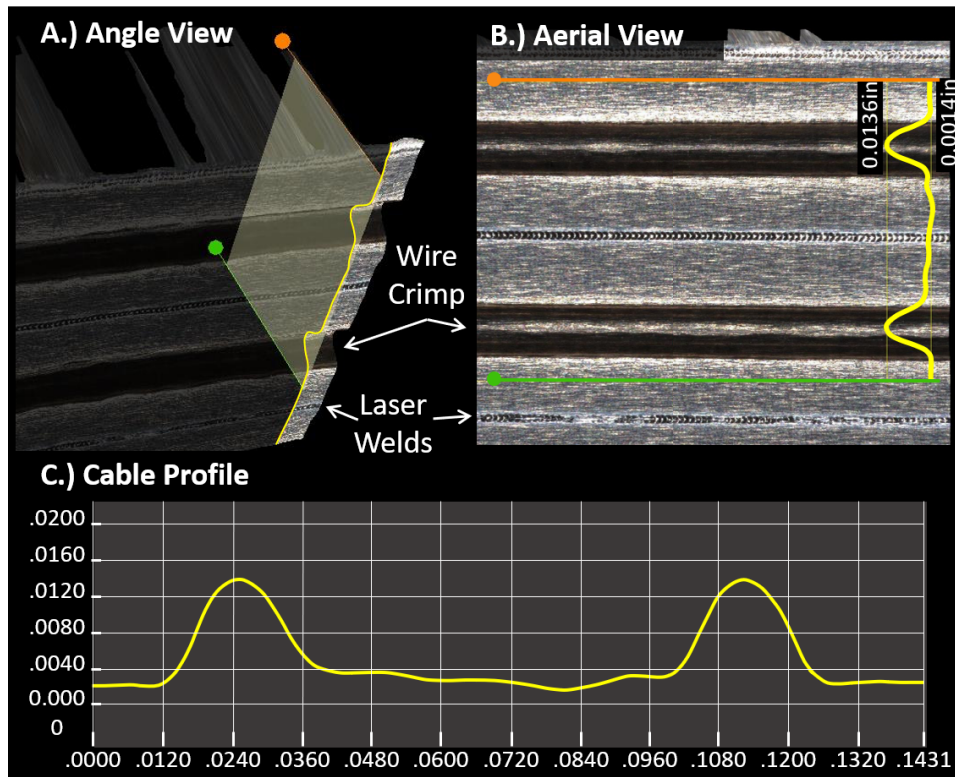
Manufacturing data obtained from JT Automation during a prototype cable manufacturing run. A.) Angle view showing a single sheet of NbTi foil with two crimps made to house wires with continuous laser welds in-between. B.) Aerial view of the NbTi foil showing the same welds and crimps pictured to the left. C.) Cable profile measured in inches. In all views the cable profile is highlighted in yellow. The profile shows good uniformity and repeatability across the length of the cable. The laser welds appear high-quality.
